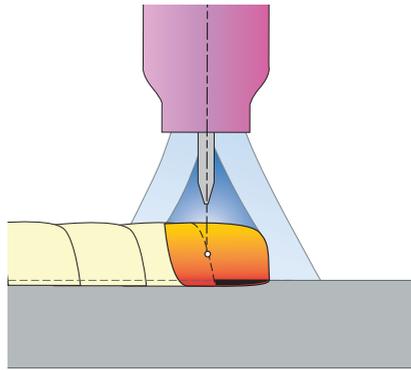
Cladding a horizontal surface in the flat welding position. To reduce dilution to a minimum, each weld pass is essentially deposited on the previous one. Only a small part fuses with the substrate surface.
